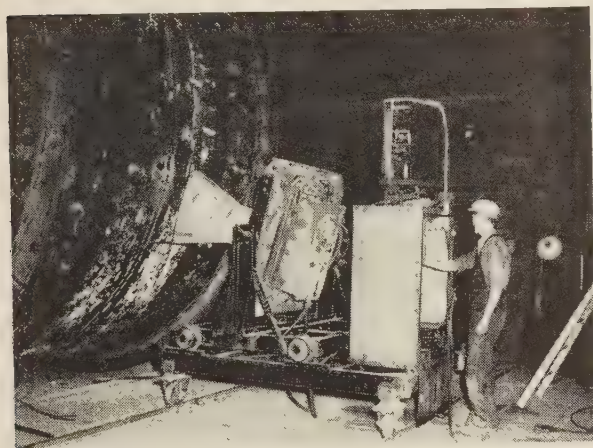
PORTABLE X-RAY APPARATUS USED IN FABRICATING PLANT
